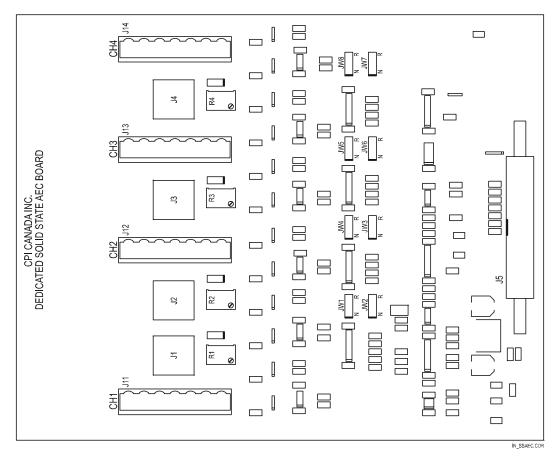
D-5: Dedicated solid-state AEC board (assembly 737992)
